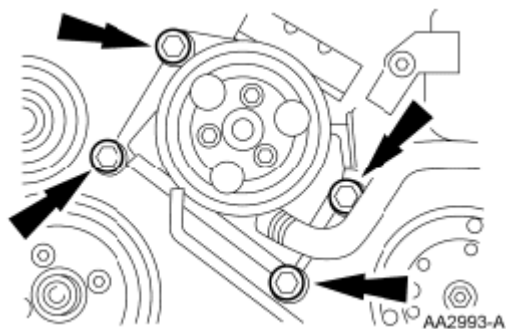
Locating A/C Compressor And Power Steering Pump Bracket Bolts
